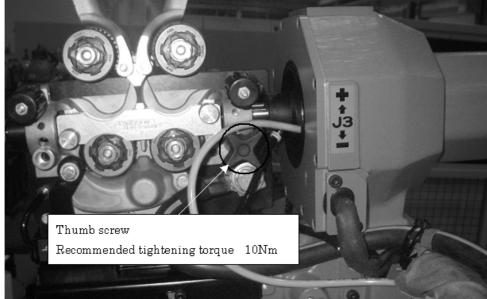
(g) Remove the thumbscrews of wire feeder
